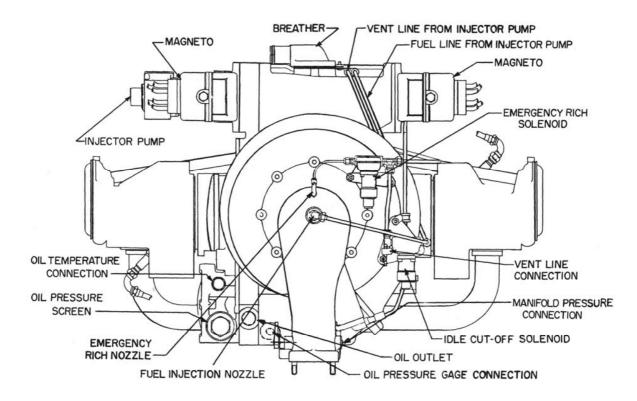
Rear View, IGSO-480 – Simmonds Injector
